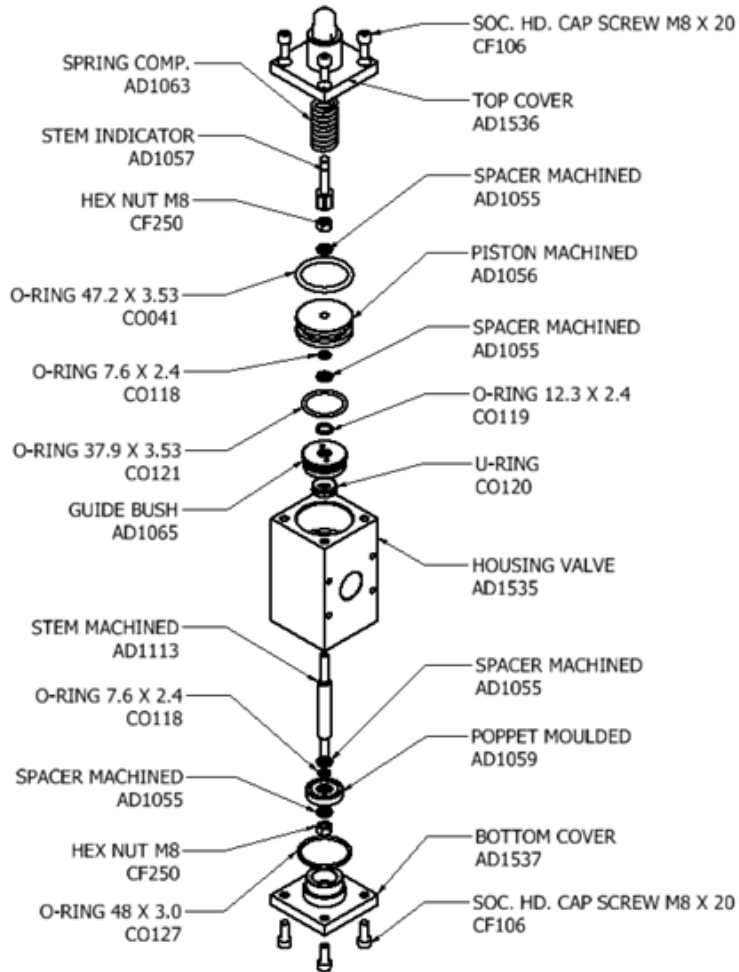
Exploded view of inlet valve assembly-Dryspell Plus models 100 & 125
